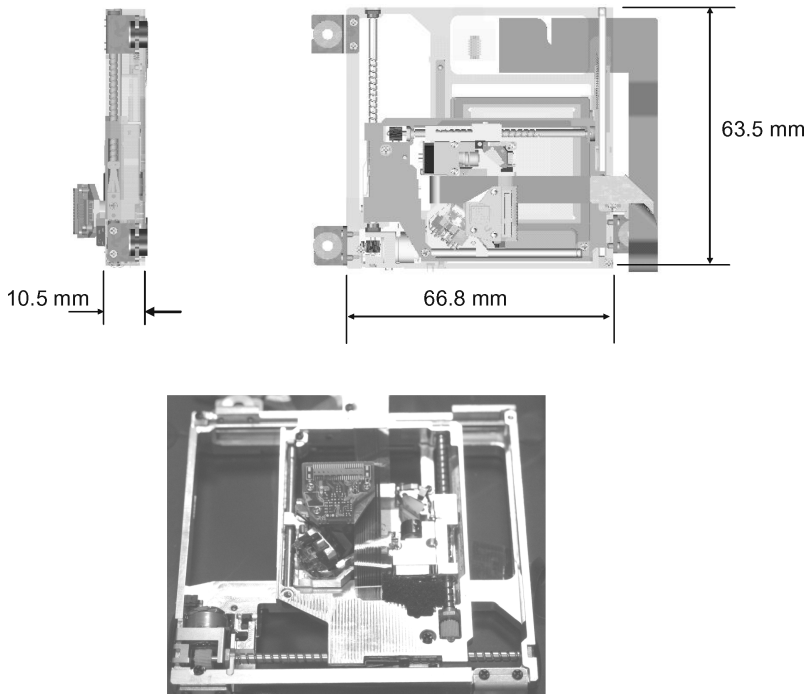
Photograph and CAD drawing of HROM reader mechanism with dimensions
